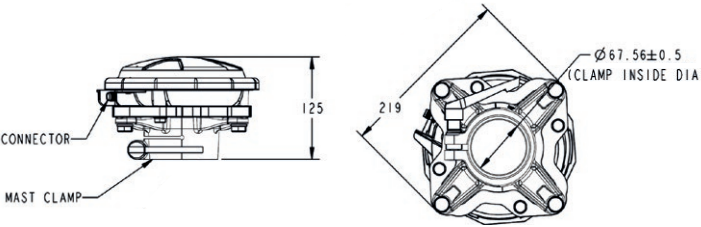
Technical Drawing of Zephyr 3 with 3" mast mounting
